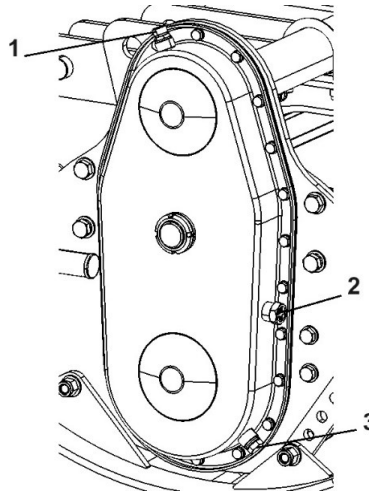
Gear transmission: 1 – filler plug 2 – inspection plug with sight glass 3 – drain plug
